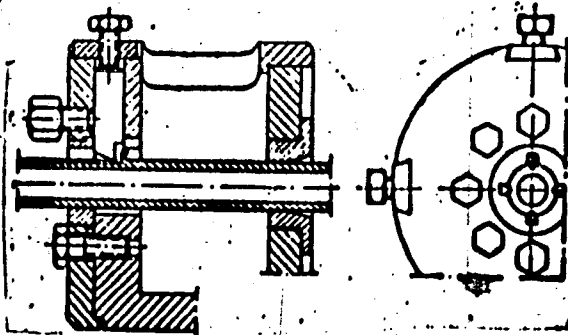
Yoke for drawing longitudinal channels on the outer surface of pipes.
